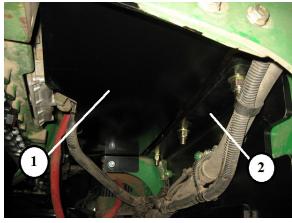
Engine Shield Installation Key 1 – Engine Shield Key 2 – RH Inside Support Bracket of Frame Mount (Reference)
